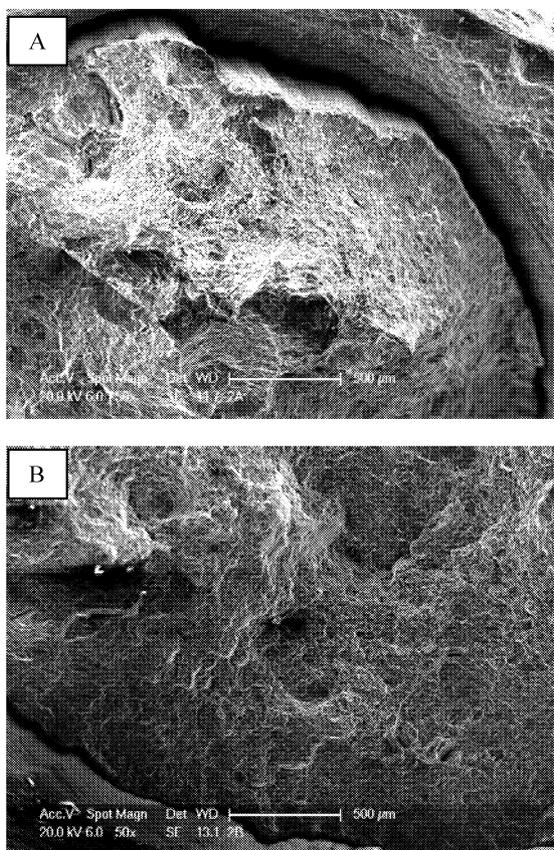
Rods fracture topography after the extrusion of feedstock with plating thickness of a) 5 mm and b) 3mm.
